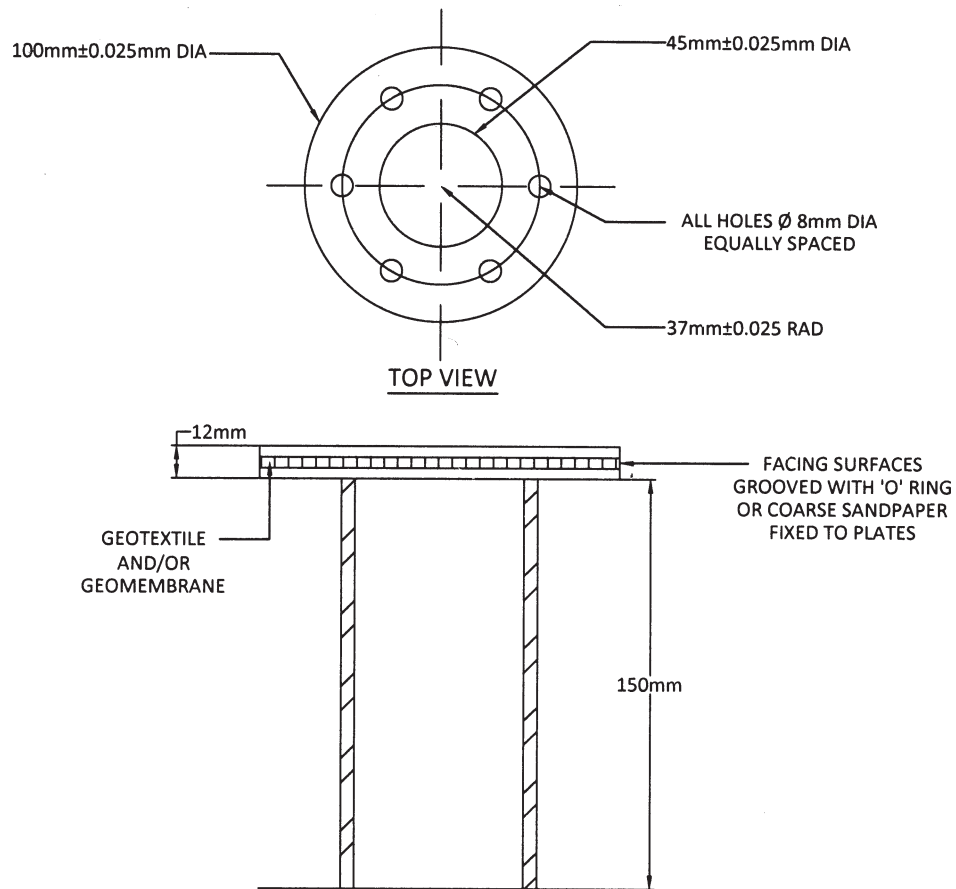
TEST FIXTURE DETAIL (NOT TO SCALE)
